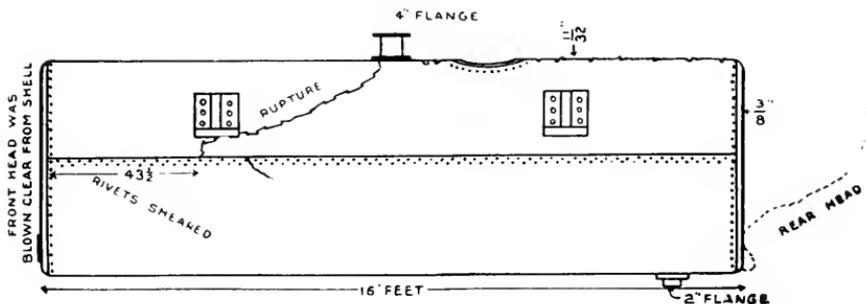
RIGHT-HAND SIDE OF BOILER, SHOWING LINES OF RUPTURE.
